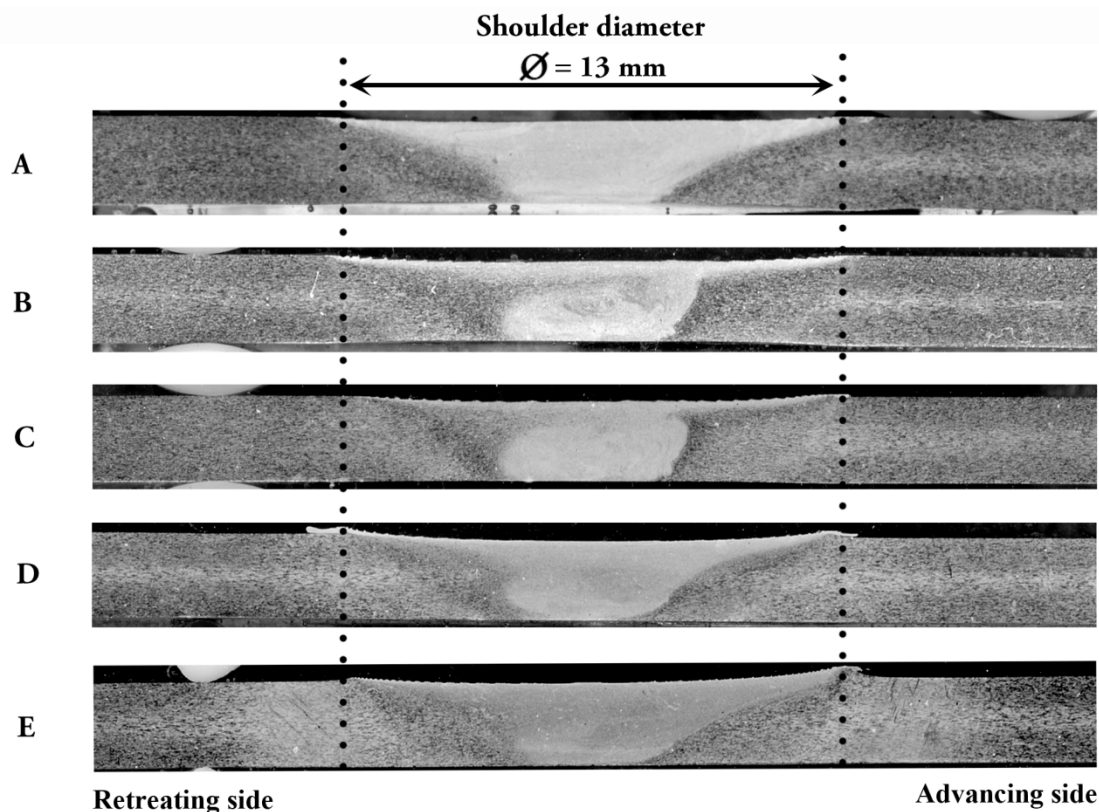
Optical macrographs of the weld cross-section for the five welding conditions given in Table 4-1
